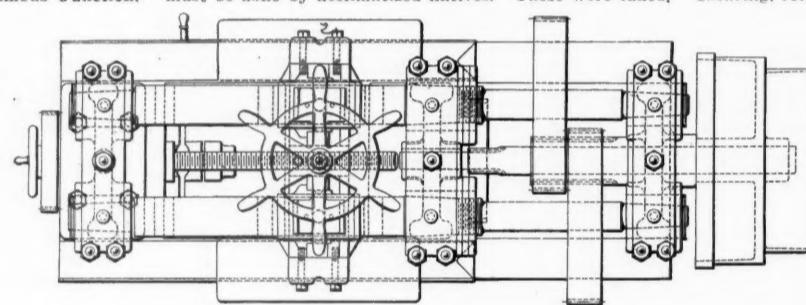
Two-Spindle Car Brass Boring Machine—Altoona Spring Shop.
